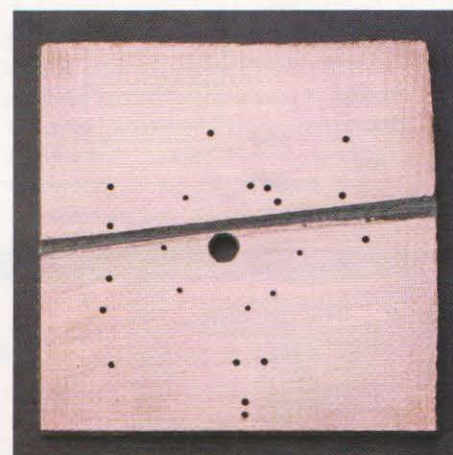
Bottom of the board, showing the wide cut that separates AGND & DGND.
